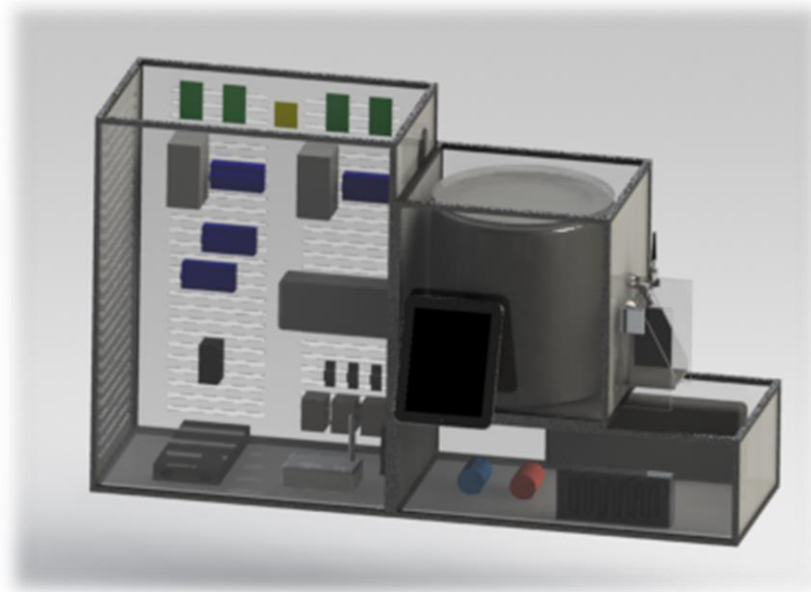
This is an illustration of the minimum components of the enclosure subsystem
